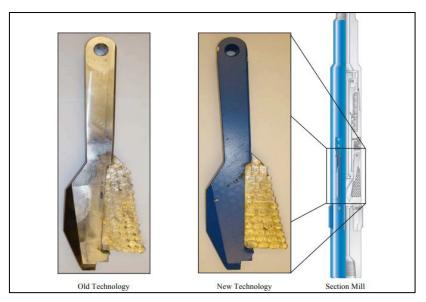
Previous Cutter Design vs. New Cutter Design, and Section Milling Tool (Stowe & Ponder, 2011)
